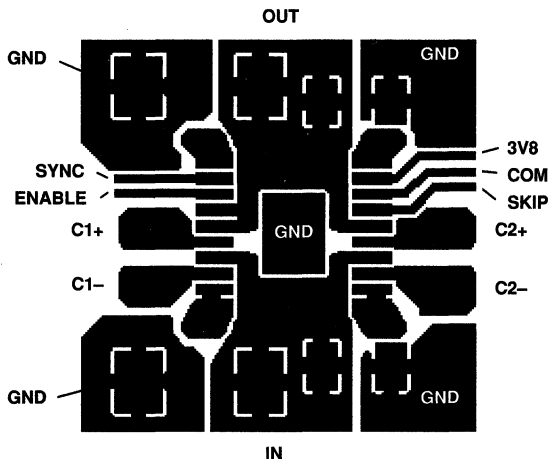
Recommended PCB Layout for TPS60101 (top view)
